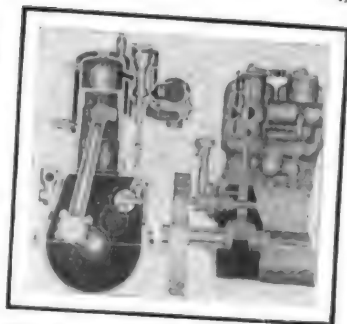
MONAHAN PISTON-VALVE ENGINE
